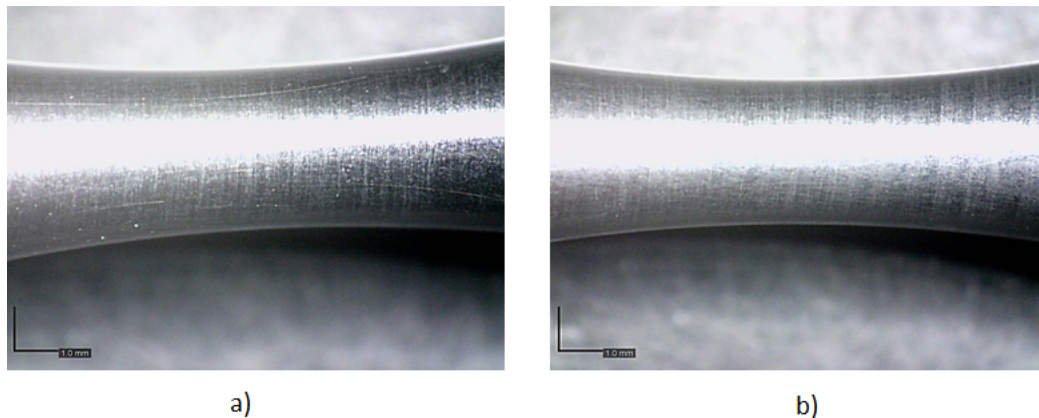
Surface finishing of the specimens. a) Specimen 1. b) Specimen 2.
